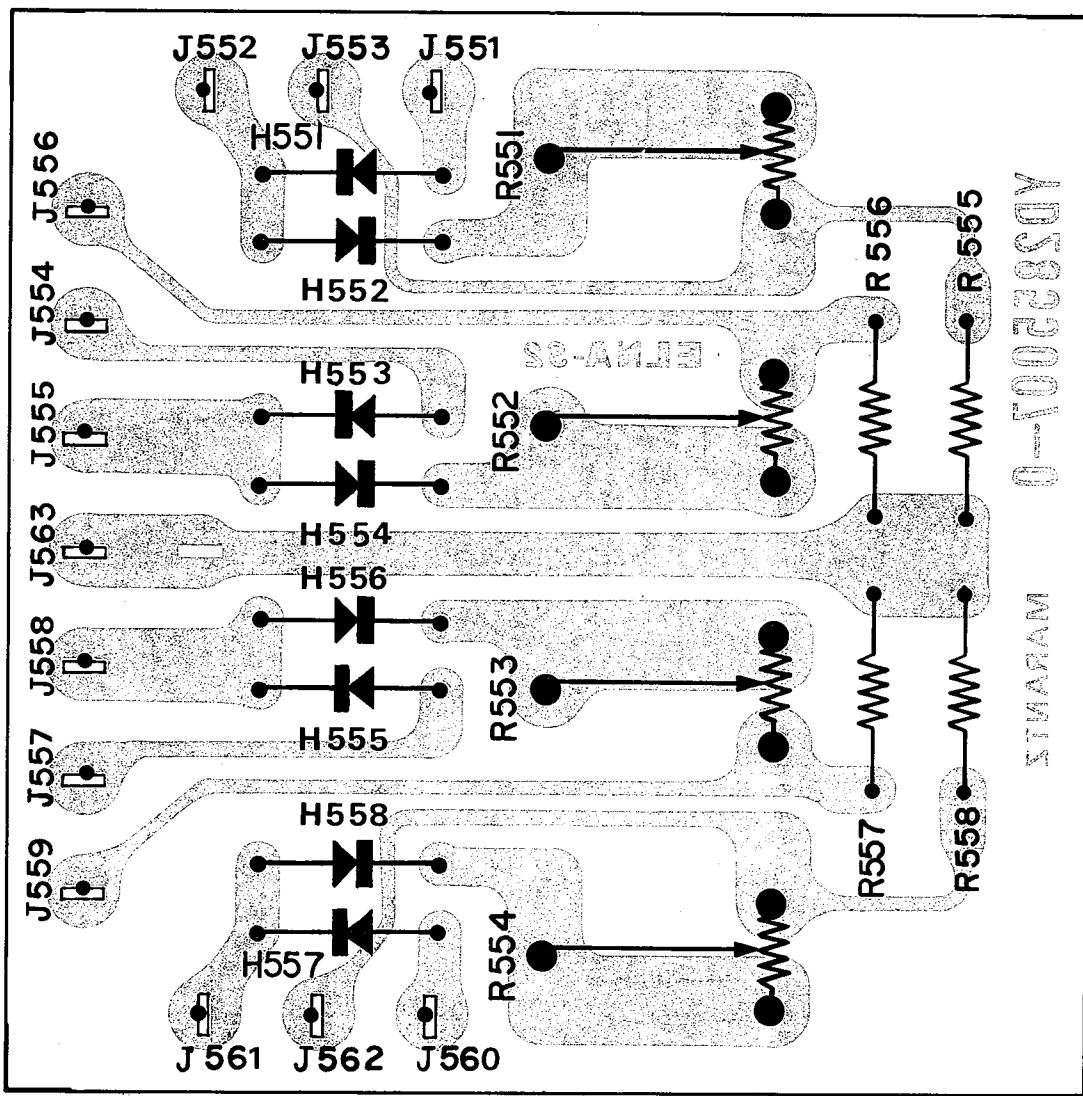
Meter Rectifier Unit Assembly P550 Component Locations
